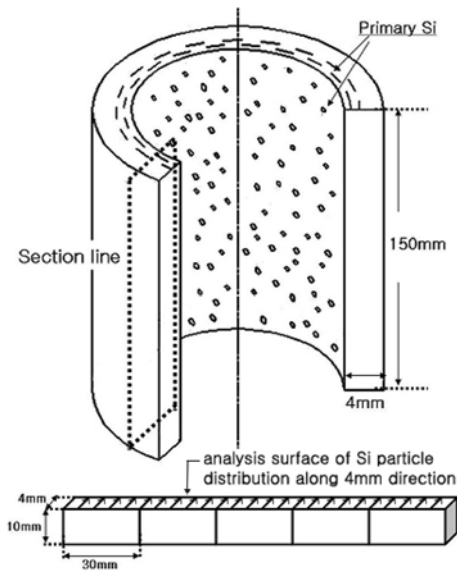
Arrangement of analysis samples in cylindrical centrifugal castings.
